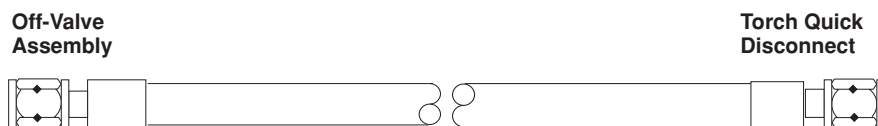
Plasma Gas Hose Assembly, LH "A"
